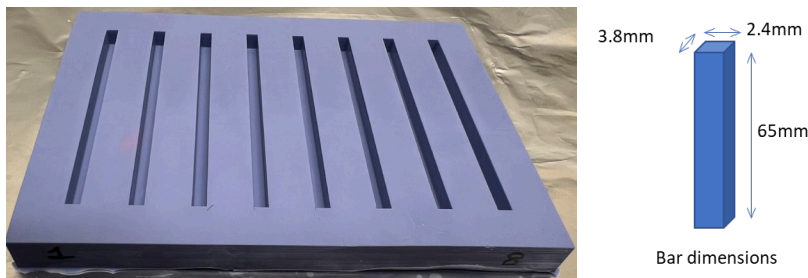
Silicone mold containing 8 rectangular cavities for composite creation. Dimensions for final composite specimens shown.
